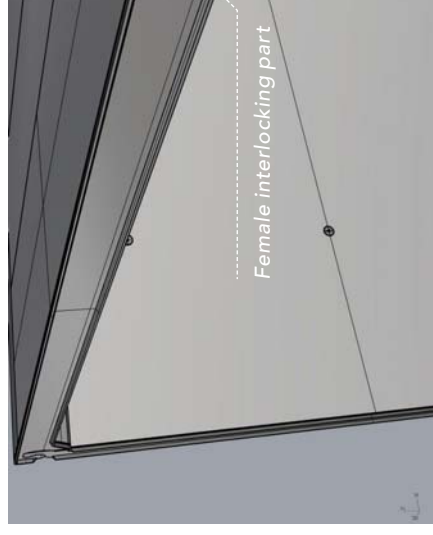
An interlocking surface ensures the parts sealing surface from damage which could compromise
